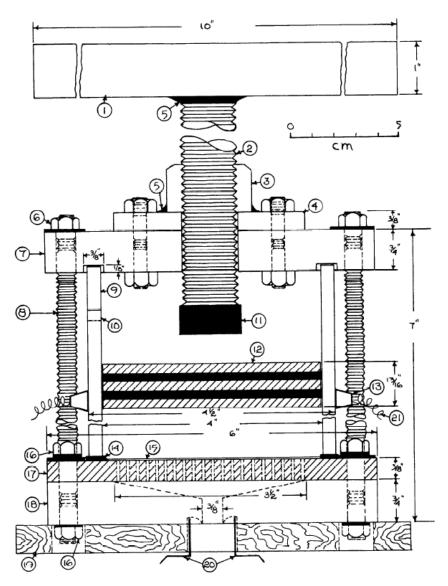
Cutaway view of sediment squeezer: 1) Galvanized pipe, 2) threaded rod (23 cm long), 3) bolt to match 2, 4) iron plate, 5) weld between 1 and 2 and between 3 and 4. The above five items are all coated with a clear acrylic spray (Crylon), 6) Hex nut and flat washer, 7) aluminium top plate, coated. Parts 1,2,3,4 and 7 are permanently assembled. 8) Threaded rod, 9) PVC tubing, lathed square on top and bottom, 10) air hole, 11) Plastic cap to prevent abrasion of Teflon piston, 12) Teflon piston with two neoprene O-rings. The clearance between the piston and the PVC wall should be just enough to allow the piston to be forced by hand through the cylinder with the O-rings not in place and no lubricant. Pistons should be mated to cylinders because of variation in the diameter and shape of PVC tubes. 13) Countersunk steel band around PVC wall with provisions for attaching a spring to the band, 14) Neoprene nonpermeable gasket, 15. Whatman No. 50 filter paper (2 sheets), 12.5 cm., 16) Hex nut, lock washer and flat washer, 17. Perforated Teflon baseplate, 18. Aluminium base with drainage surface and exit hole, coated with clear acrylic spray (or Teflon base). Parts 8, 16, 17 and 18 are permanently assembled., 19) squeezer board, drilled to accept 8, 20) Polyethylene 125-mL narrowmouth bottle, 21) Springs with attach from band to eyebolt on squeezer board. Sasseville et al. (1974)
